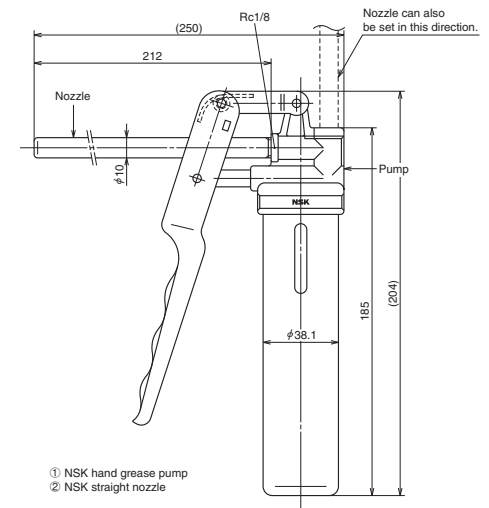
NSK Hand Grease Pump with NSK straight nozzle
